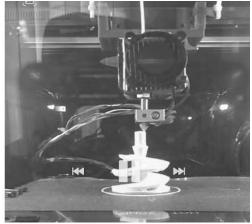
Printing 3D Parts for a Concrete Mix Dispenser/Extruder Unit
